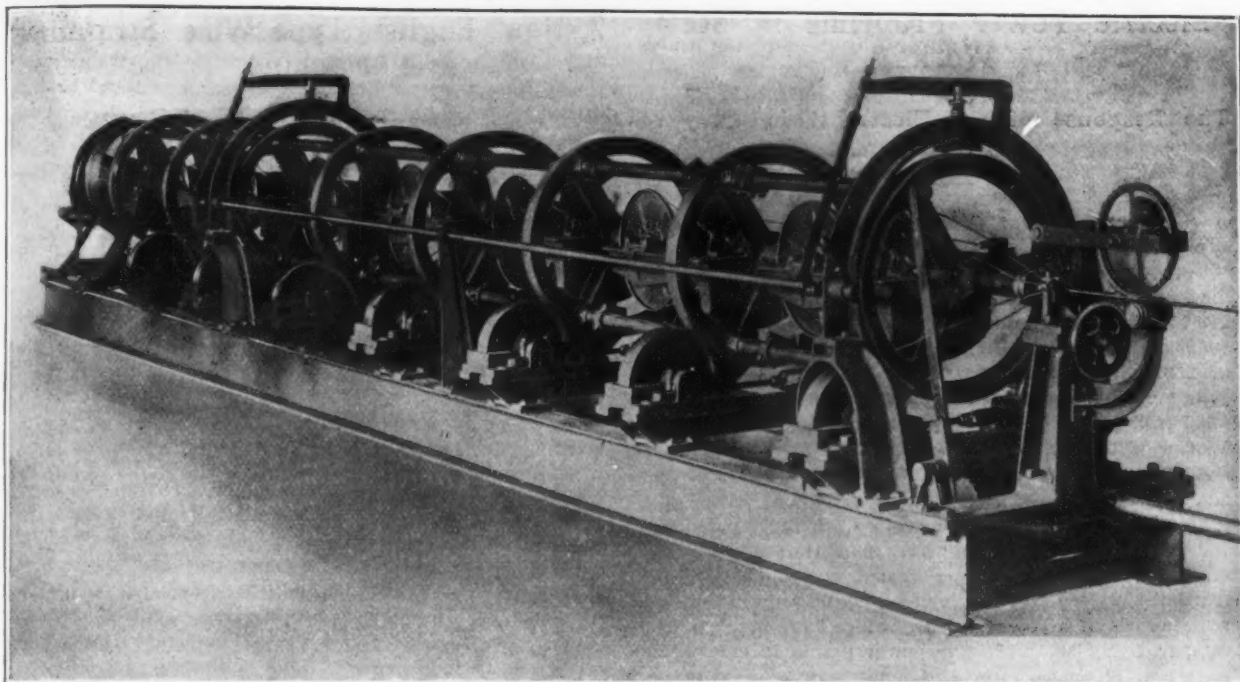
A Nearer View of the Wire Stranding Machine.
